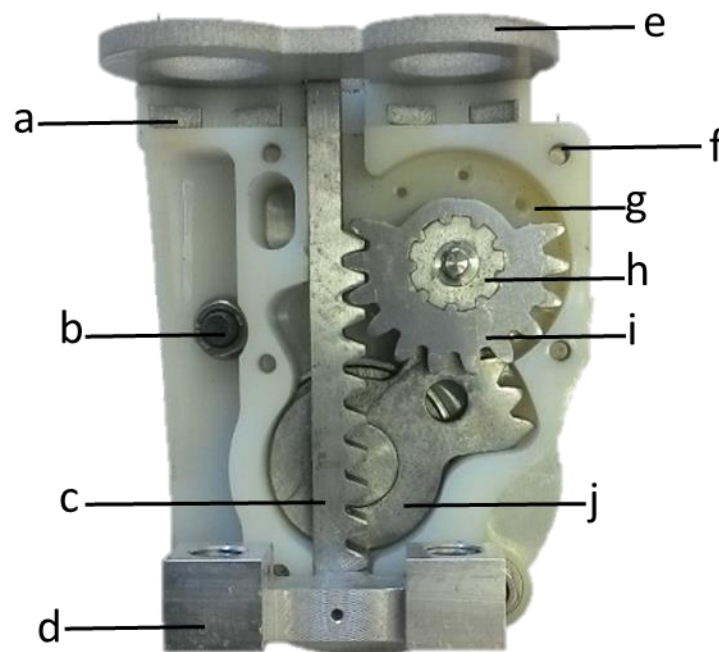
SIDE VIEW OF 3D PRINTED GEARBOX (A) LINEAR ACTUATOR MOUNTING REINFORCEMENT/ALUMINUM INSERT, (B) LEG SHELL MOUNTING HOLES, (C) GEAR RACK, (D) YOKE, (E) ALUMINUM CYLINDER HOLDER, (F) TAPPED FRONT COVER MOUNTING HOLE, (G) LUBRICATION CHANNEL, (H) COMPOUND DRIVER GEAR, (I) COMPOUND DRIVEN GEAR, (J) SECTOR GEAR.
